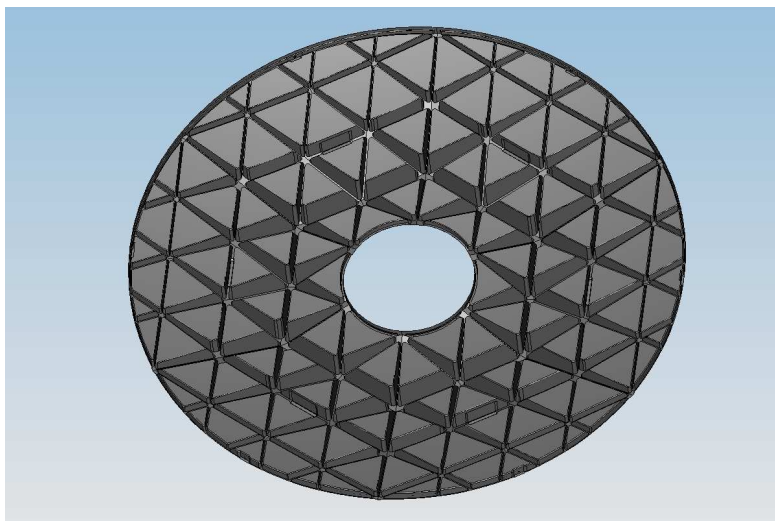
CAD model of the \varnothing 1.5m demonstrator
